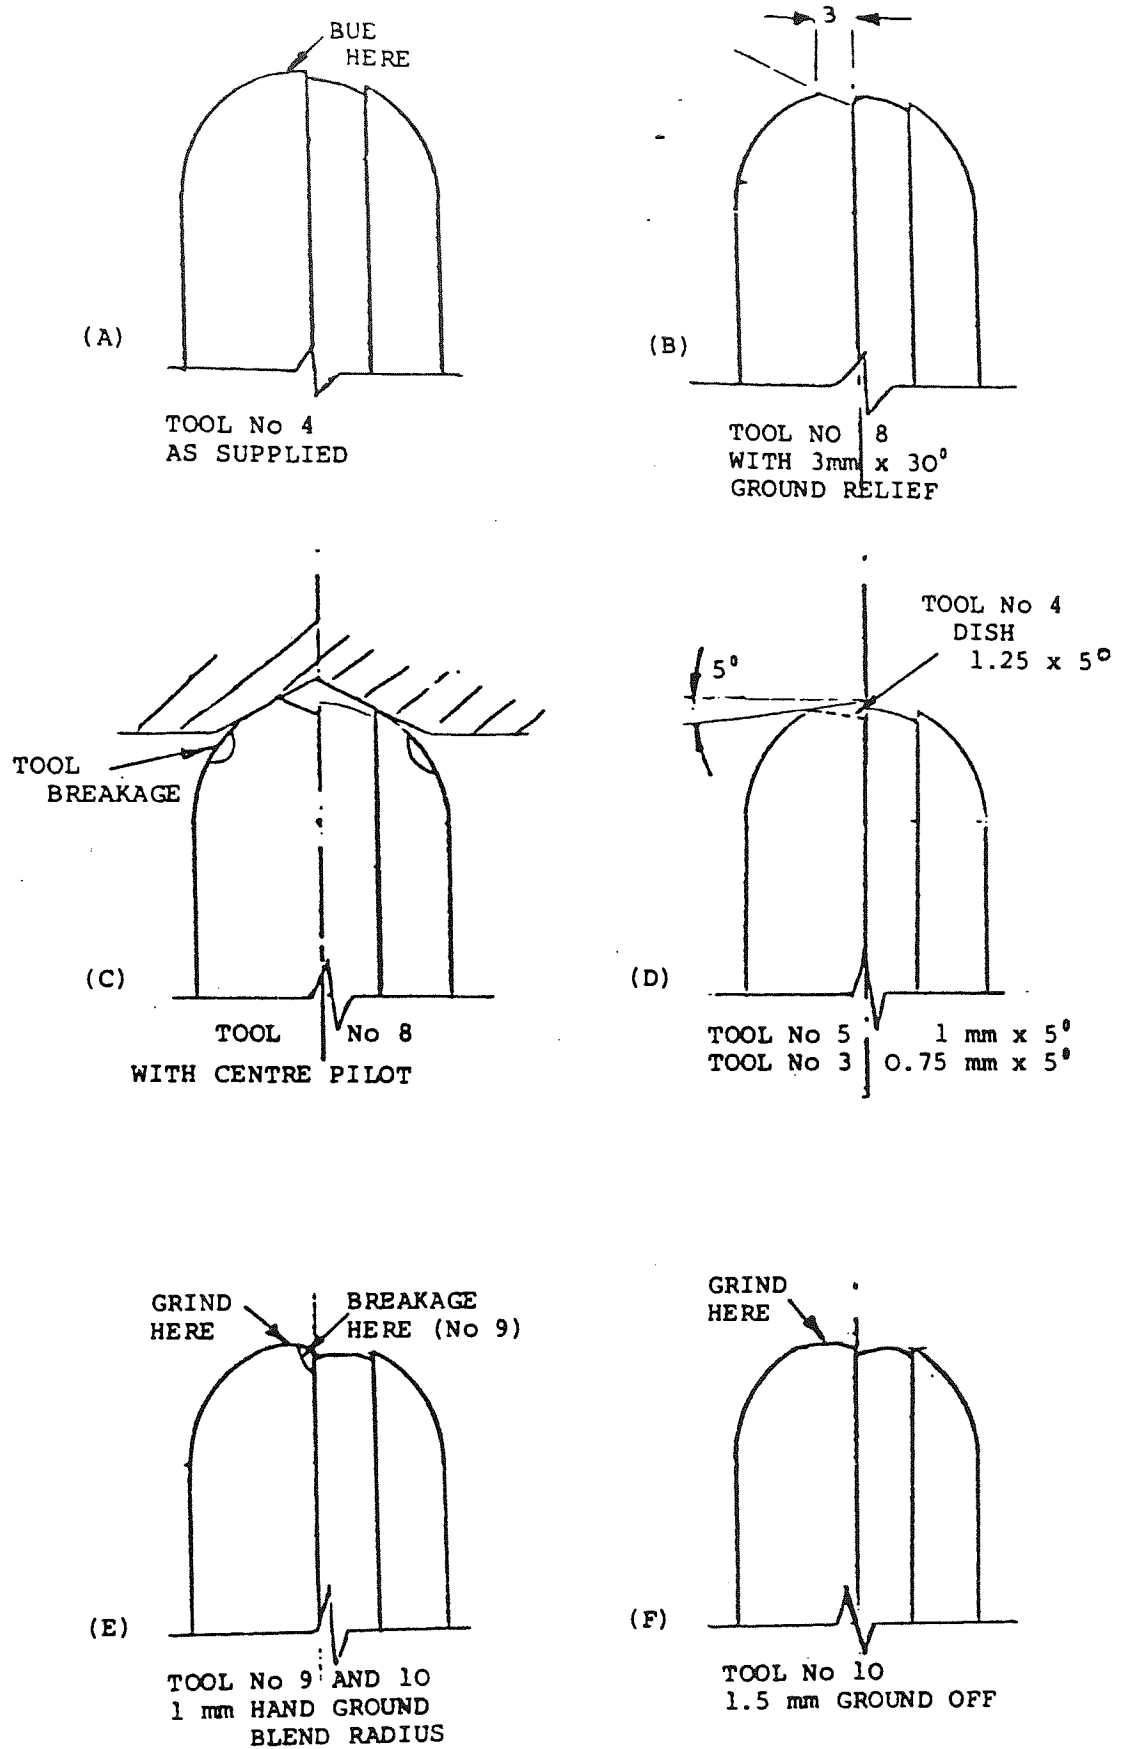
TOOL POINT GEOMETRIES -PROTOTYPE NO 2
